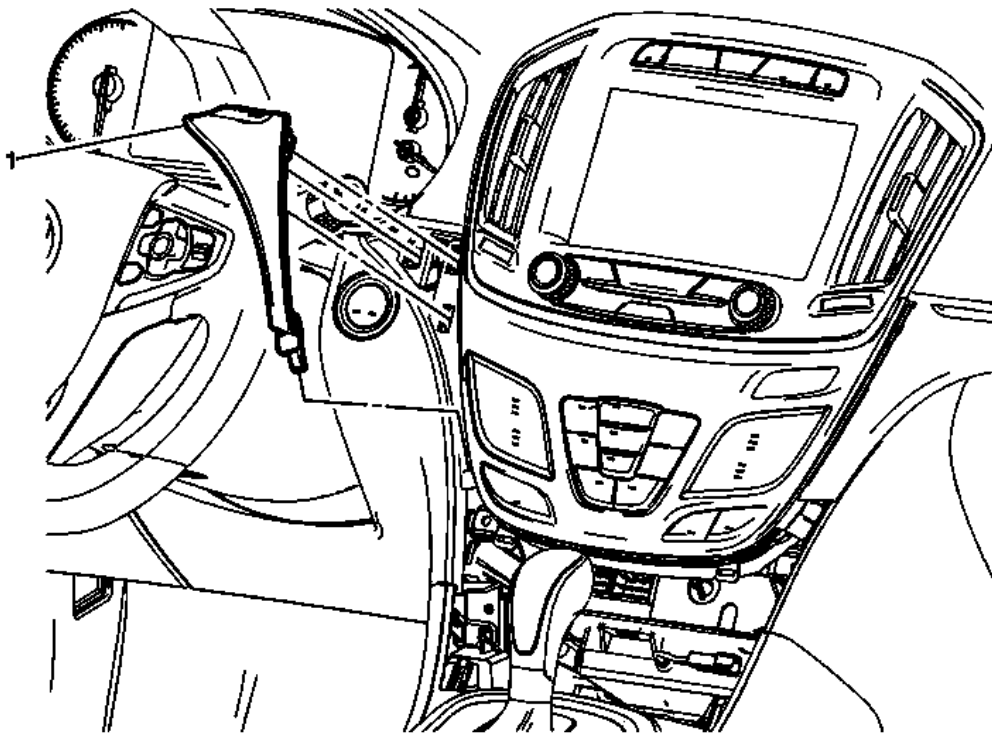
Instrument Panel Center Upper Molding (Driver Side)
